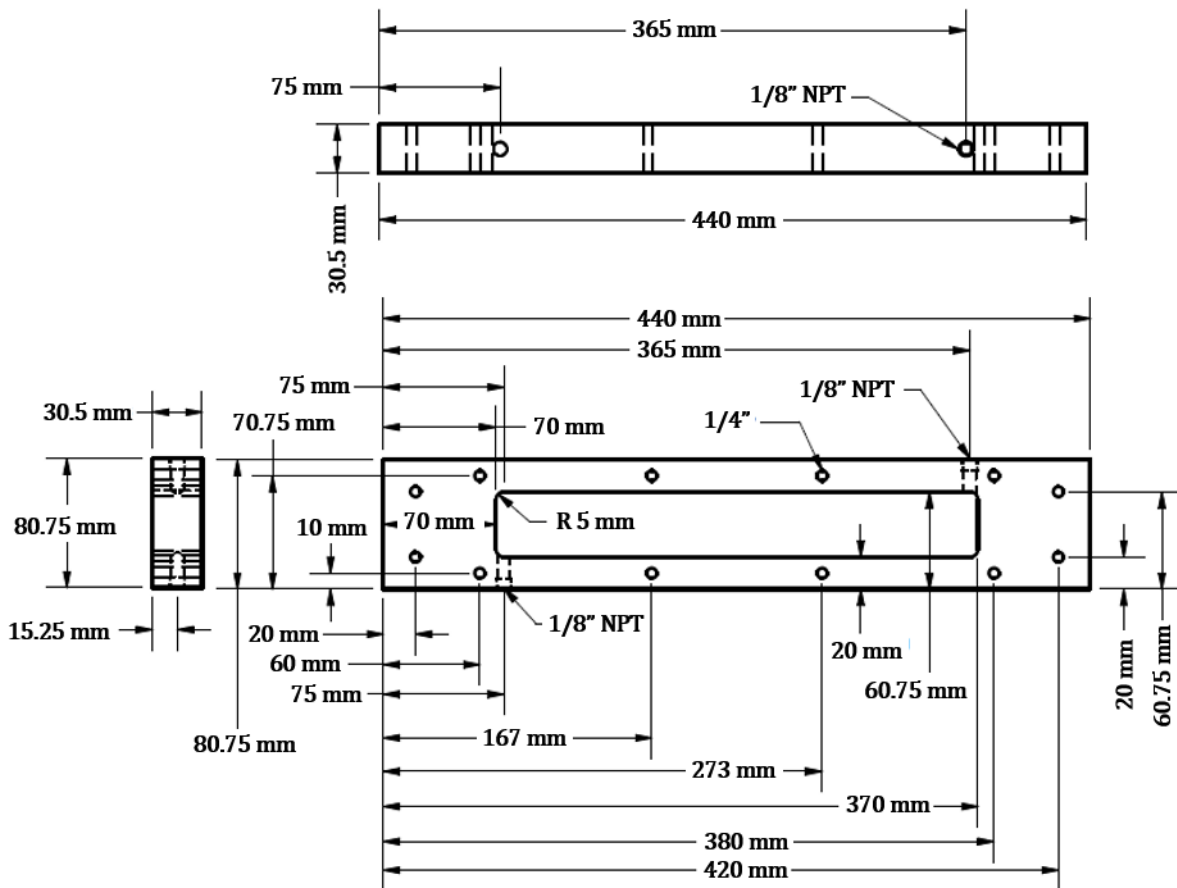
CAD drawing of MHDIE test article acrylic body showing all dimensions including diameters of through holes and threaded drain and fill holes.
